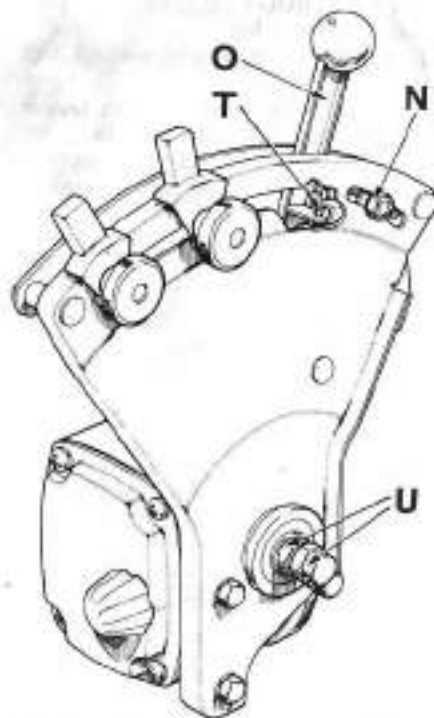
Hydraulic system control lever adjusting points; refer to text for procedure.
